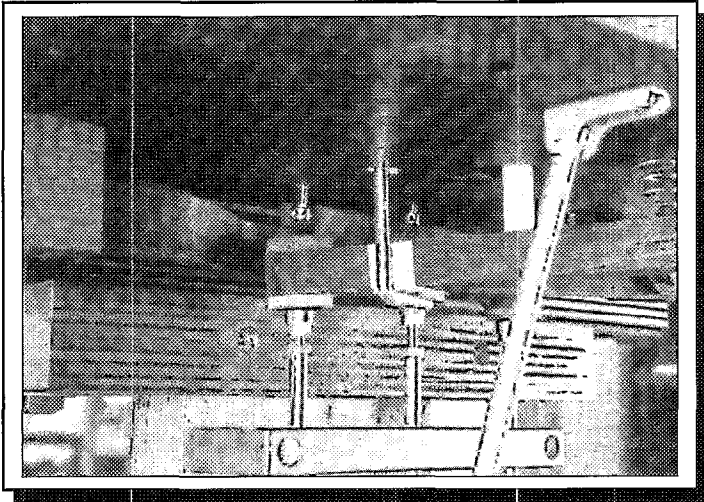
Typical trapwork design having a screw adjustment for lost motion on top of the pedal rod.
